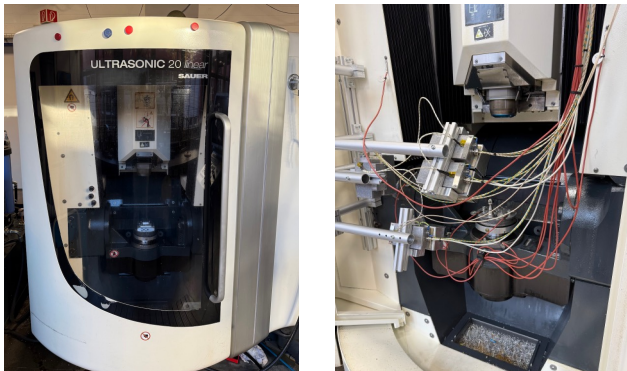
Machine tool with closed enclosure (left) and experimental setup for the compensatory approach (right).
